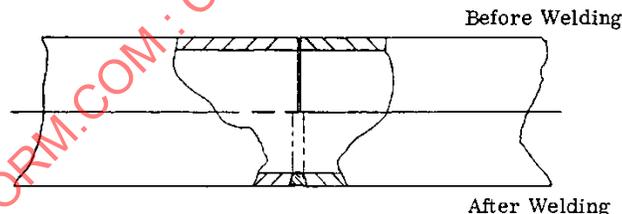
SQUARE-BUTT WELDED JOINT
